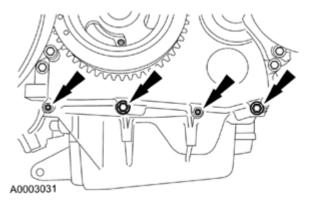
Locating Bolts And Stud Bolts Courtesy of FORD MOTOR CO.
